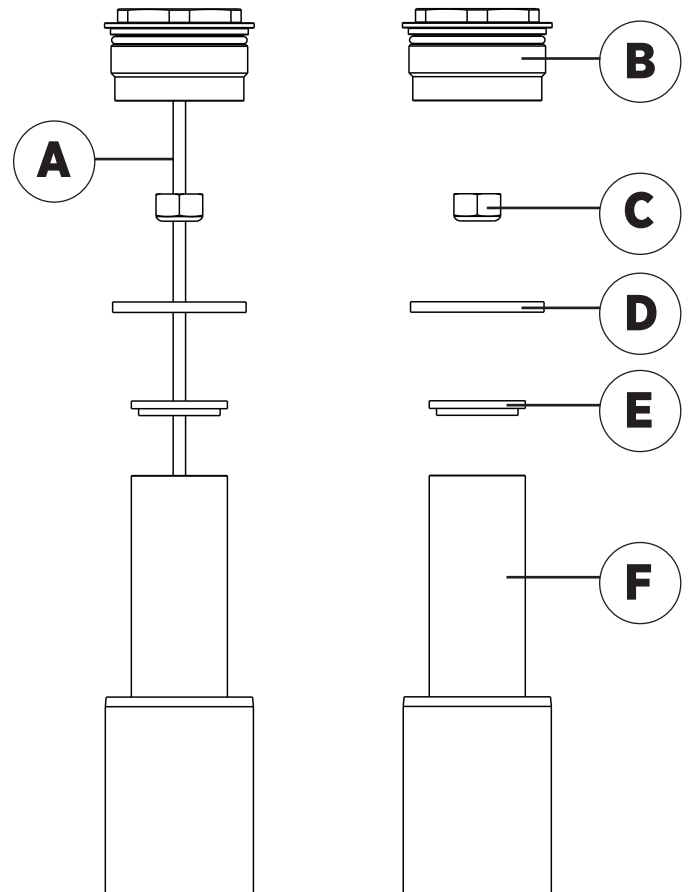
Adjustable damping models (left), non-adjustable damping models (right). Remove the stock components: adjustment rod (A), top cap (B), cinch nut (C), bottom out bumper (D), retaining ring (E), and preload spacers (F).
